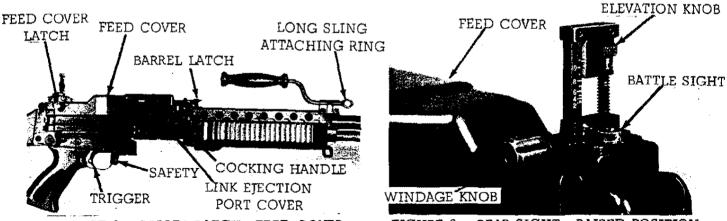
BARREL LATCH, FEED COVER LATCH, TRIGGER, AND COCKING HANDLE
